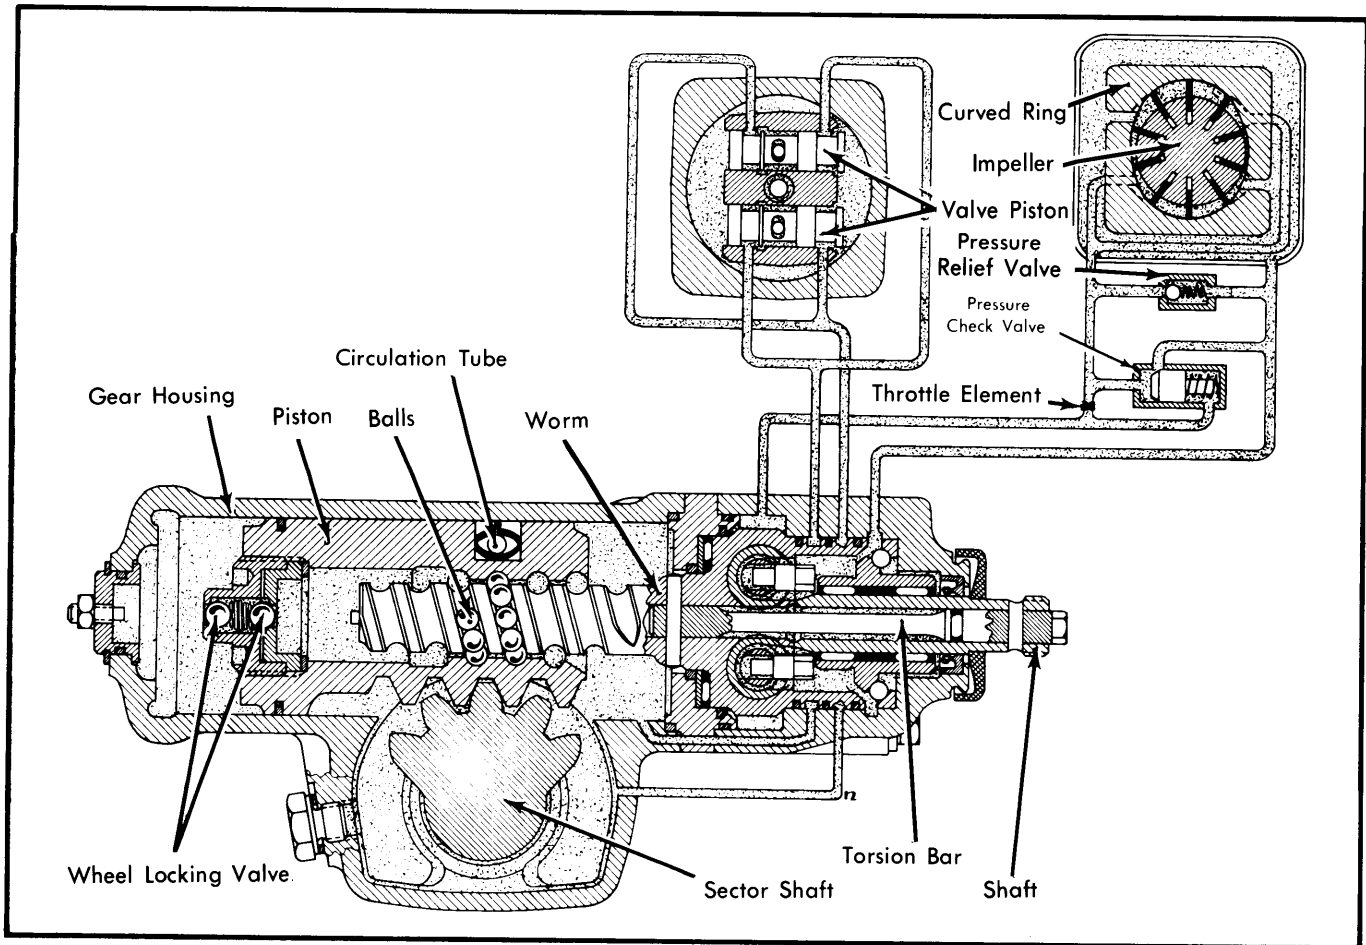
Cross-Sectional View of Power Steering Gear Assembly
